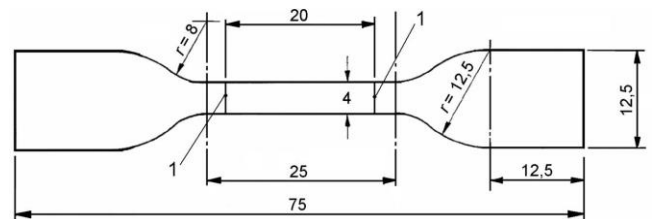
Dimensions of the Dumb-bell test pieces prepared according to Standard IEC 60811-501 [25]
